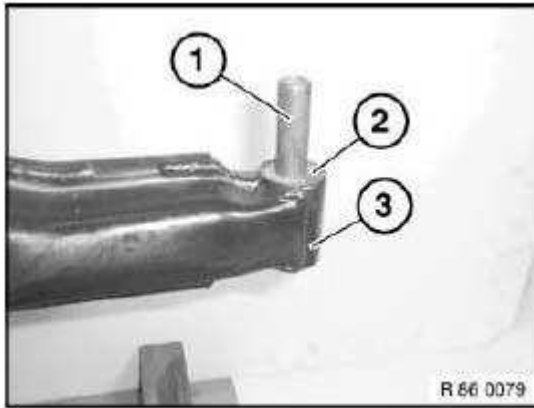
Identifying Compensating Bush, Spacer Tube & Trailing Arm Mount
